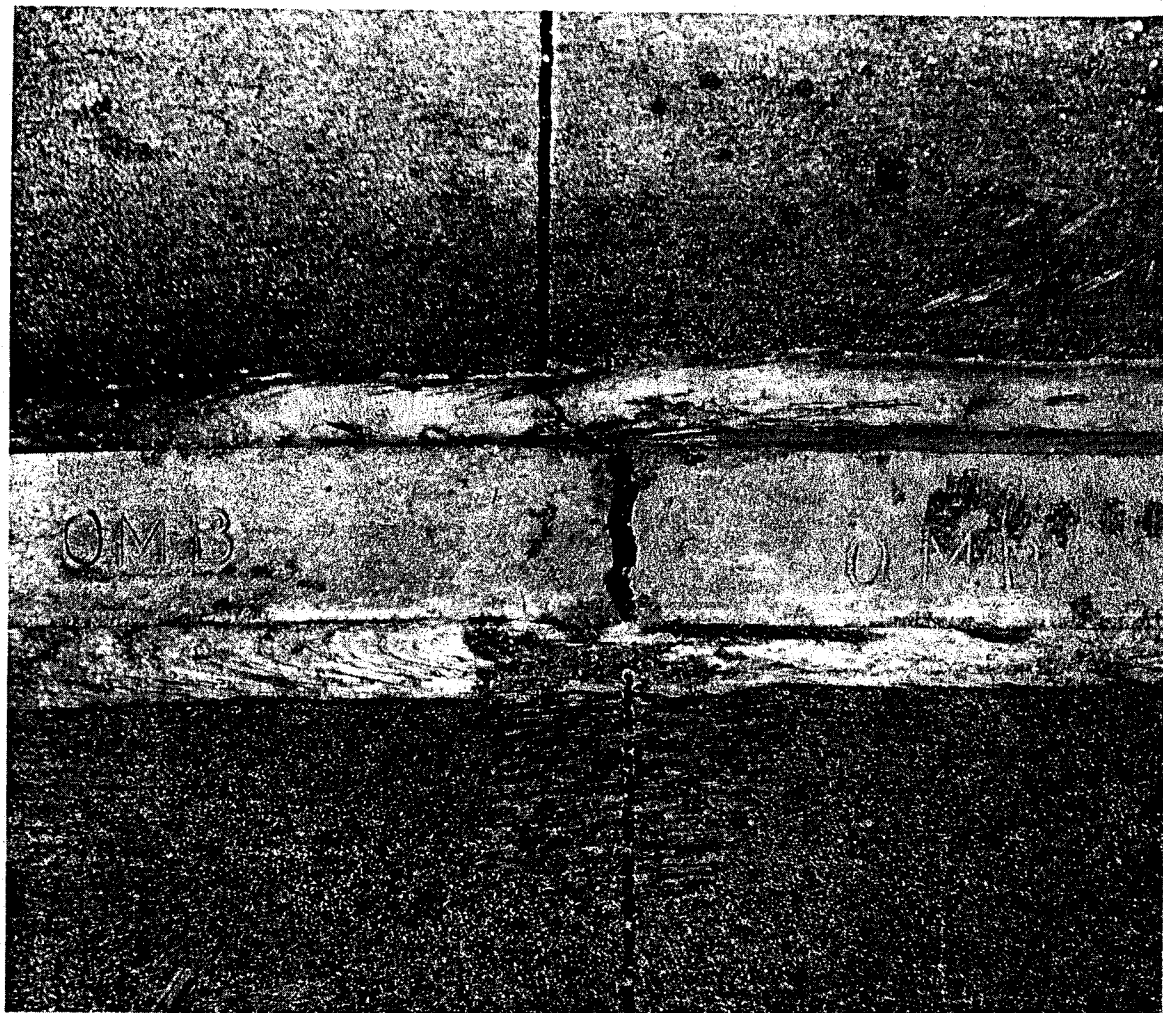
MATCHING FRACTURE SURFACES ON SPECIMENS OVFB AND OVFB-W CONTAINING THE SURFACES OF THE CRACK THROUGH THE VALVE-END STIFFENER RING AND THE ORIGIN REGION OF RUPTURE THROUGH THE VESSEL SHELL
